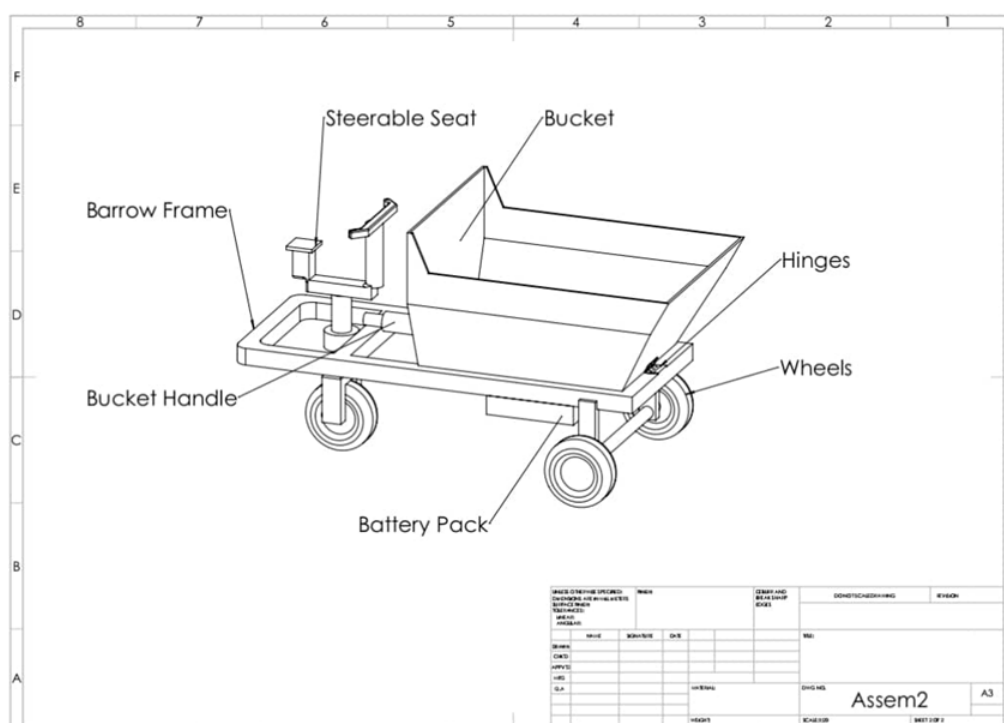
Showing parts of the electric motorized wheelbarrow
